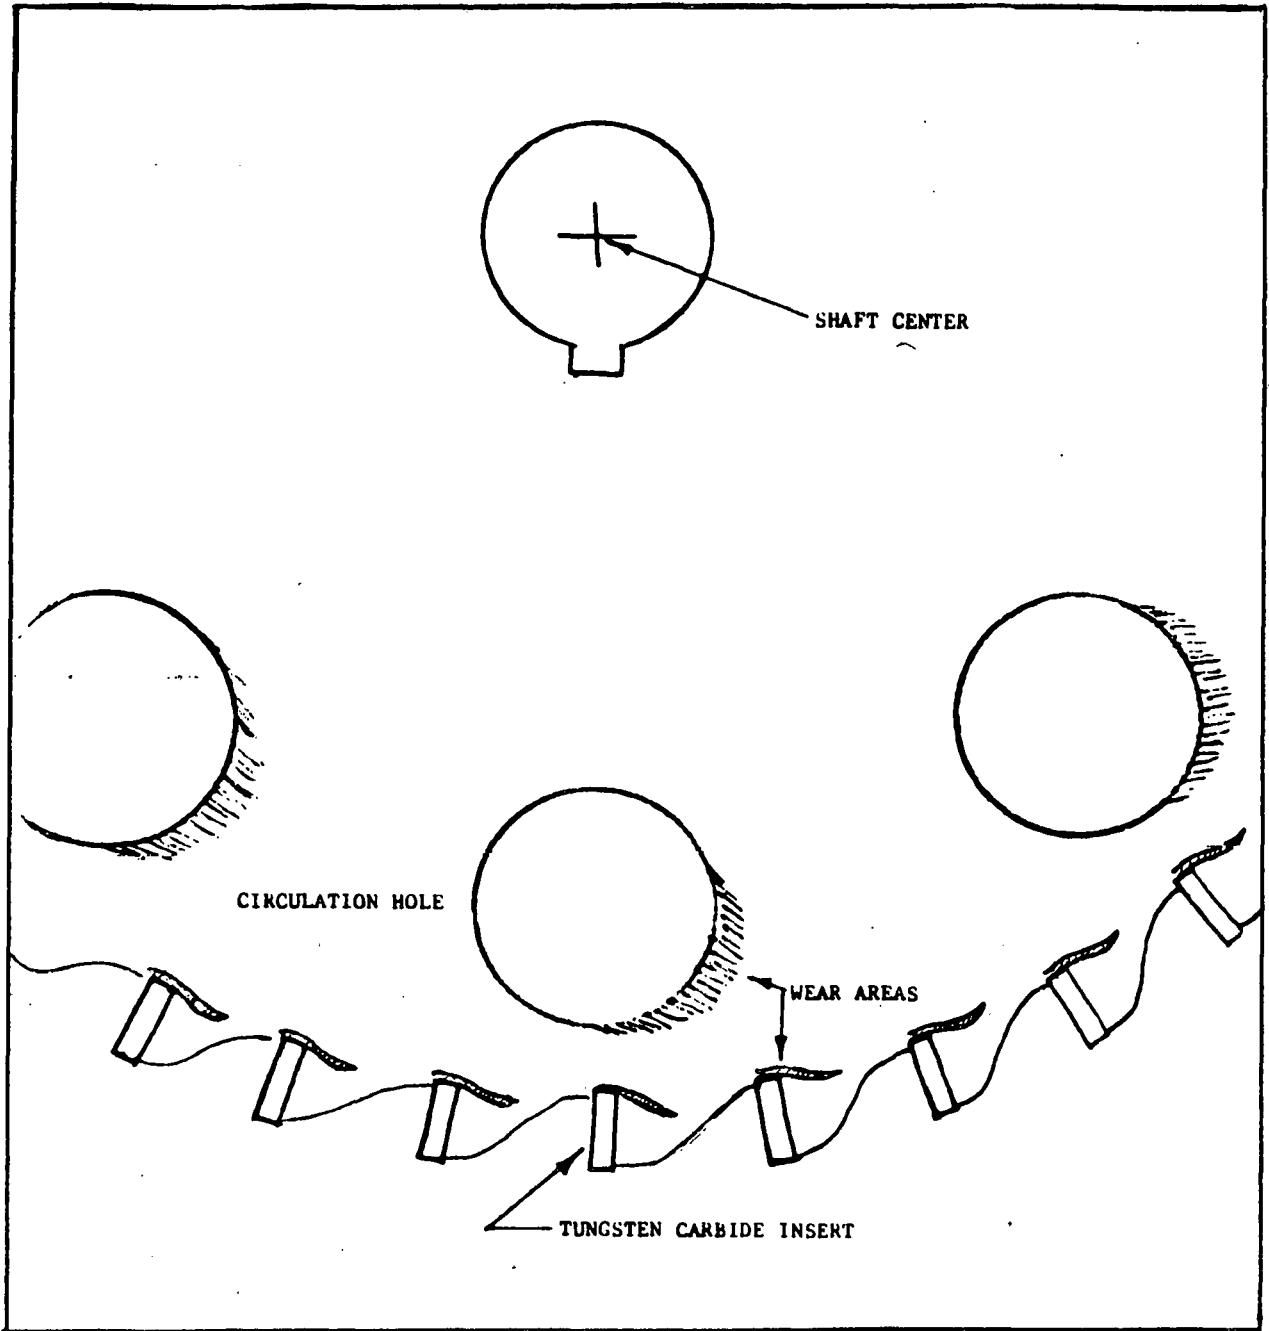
A SECTION OF A 24 INCH DIAMETER DISPERSER BLADE SHOWING TUNGSTEN CARBIDE INSERTS, CIRCULATION HOLES AND ASSOCIATED WEAR AREAS
